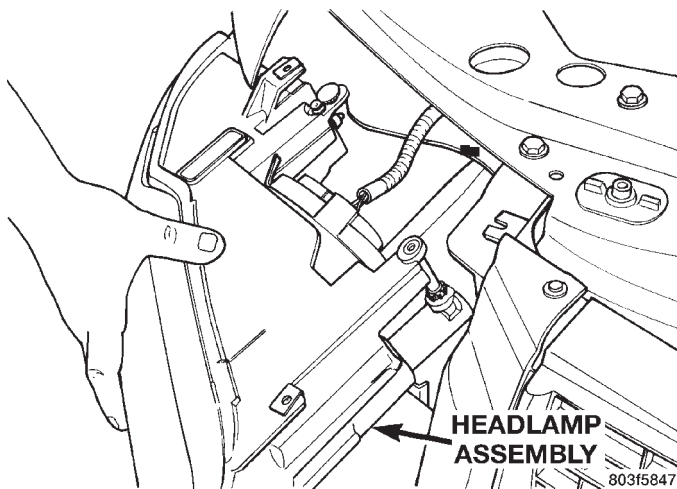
Headlamp Electrical Connector Removal/ Installation
